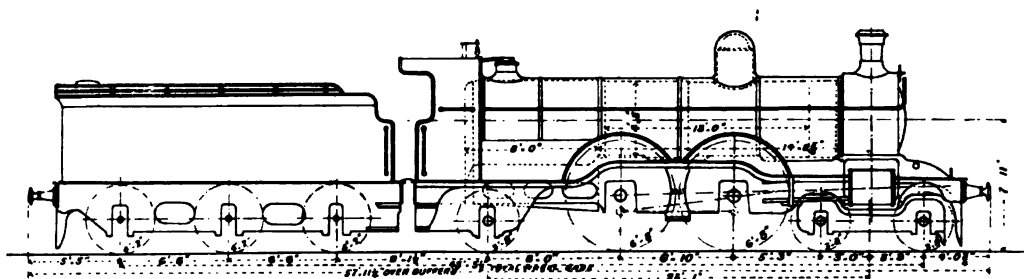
G.N.R. Four Wheels Coupled Express Engine
